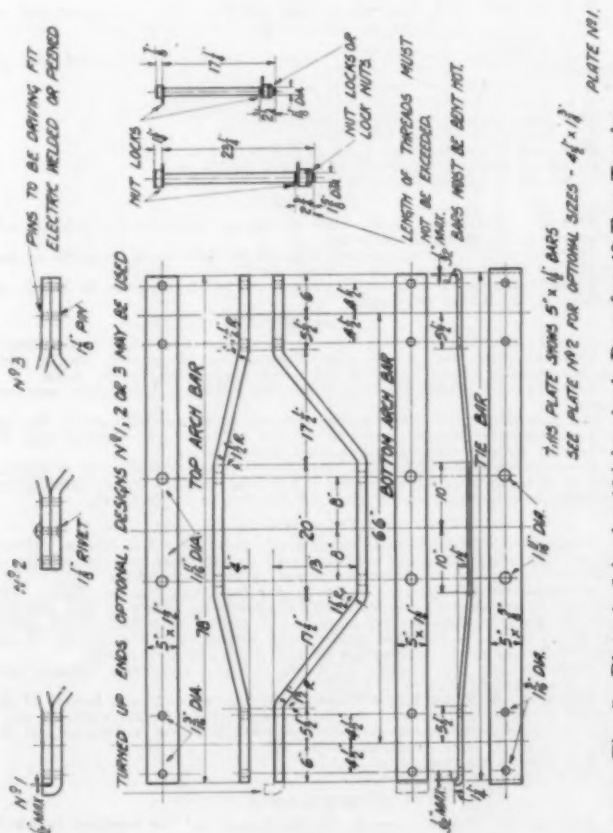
Plate 1, 5 in. by 1 1/2 in. Arch Bars for 40-Ton Trucks
